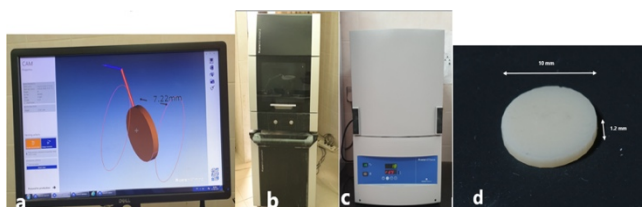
(a) Designing for the specimens. (b) Ceramill motion II machining. (c) Ceramill therm sintering oven. (d) Finished sample.
